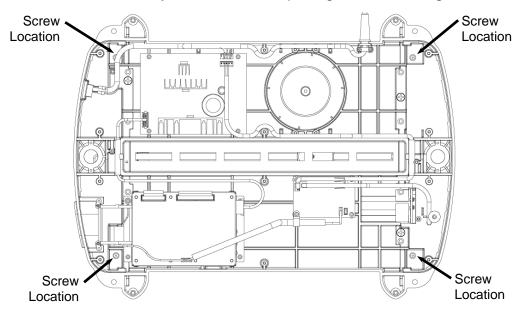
LOCATION OF BOTTOM VERTICAL GUIDE ROD SCREWS
